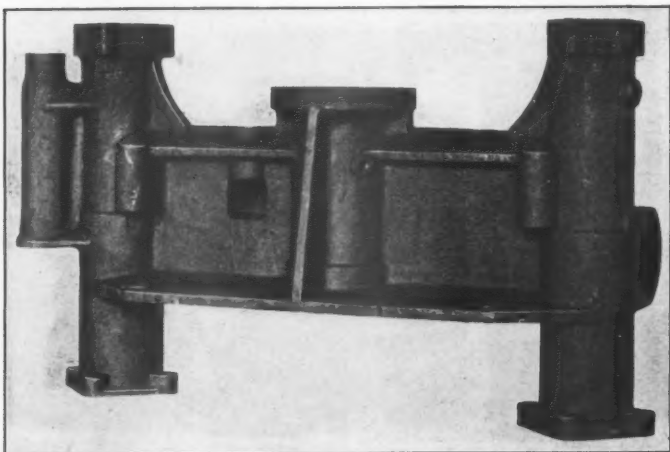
A CASTING FOR A SIMILAR MACHINE WITH UNNECESSARY MACHINING ELIMINATED
